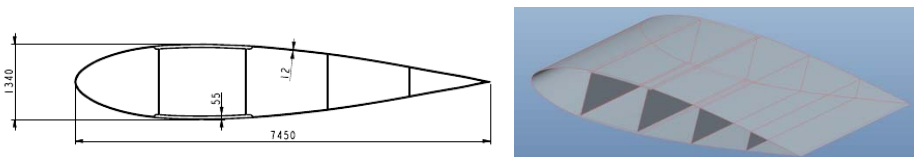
Section for the central part of the blade of the 5MW turbine. 2D sketch with dimensions (left) and 3D drawing (right), kindly provided by Per Hørlyk Nielsen from Risø DTU.
